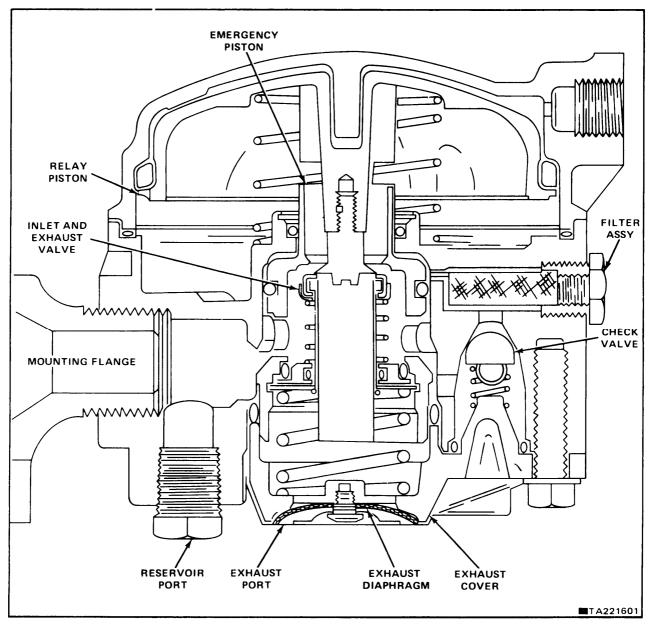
RE-6 RELAY EMERGENCY VALVE.
